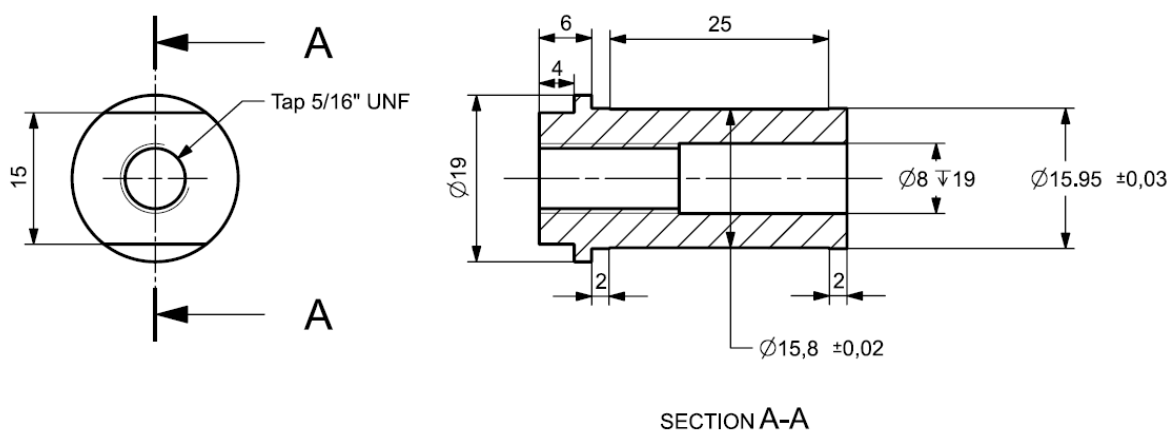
An aluminium insert manufacturing drawing featuring the dimensions and tolerance for the final insert design. Dimensions in mm.
